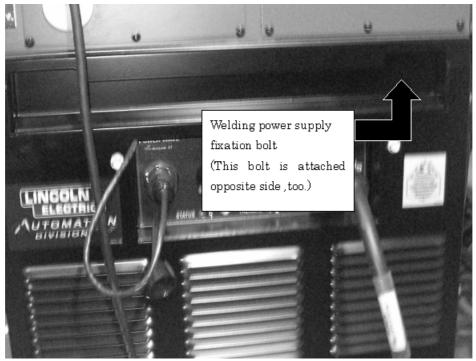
(e) Remove fixation bolt of welding power supply
